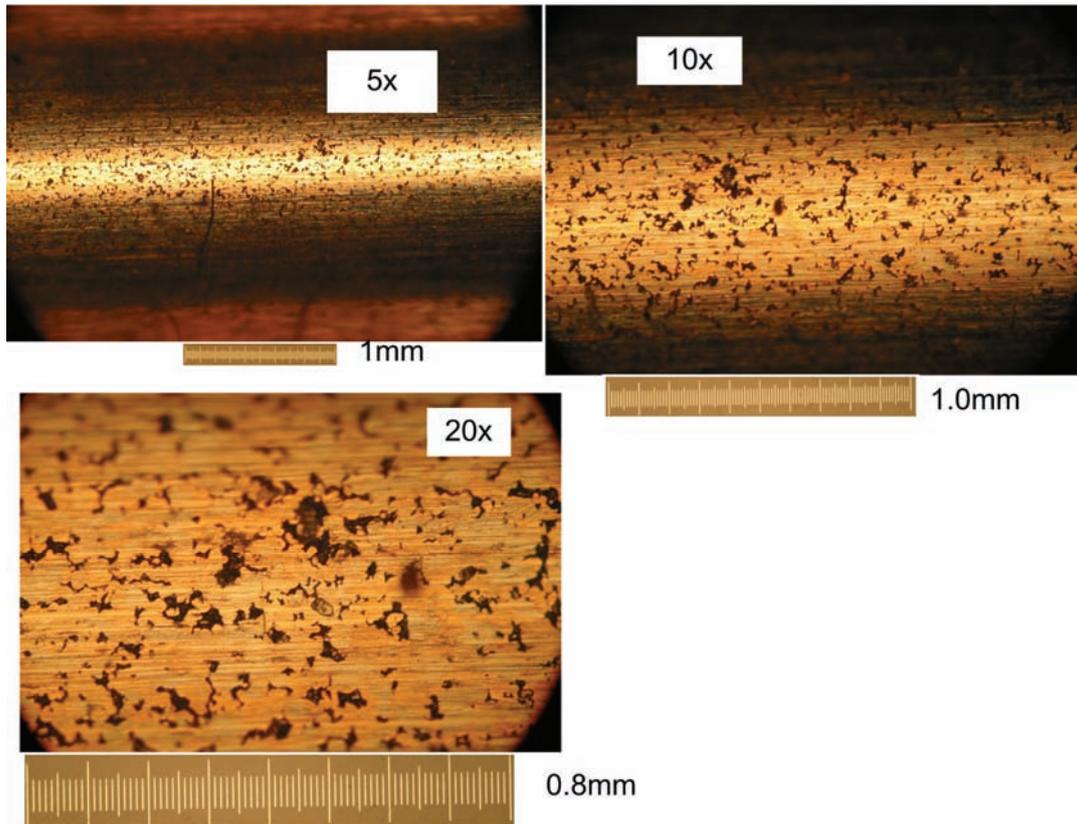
Bearing sleeve porous surface - bearing from Xilence Case Fan 92mm
